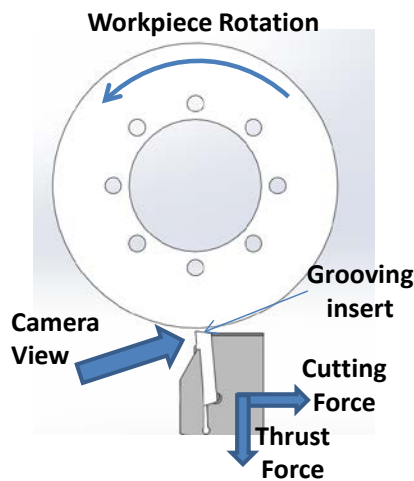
Schematic of workpiece rotation, tool and camera position. AM build direction is into the screen.
